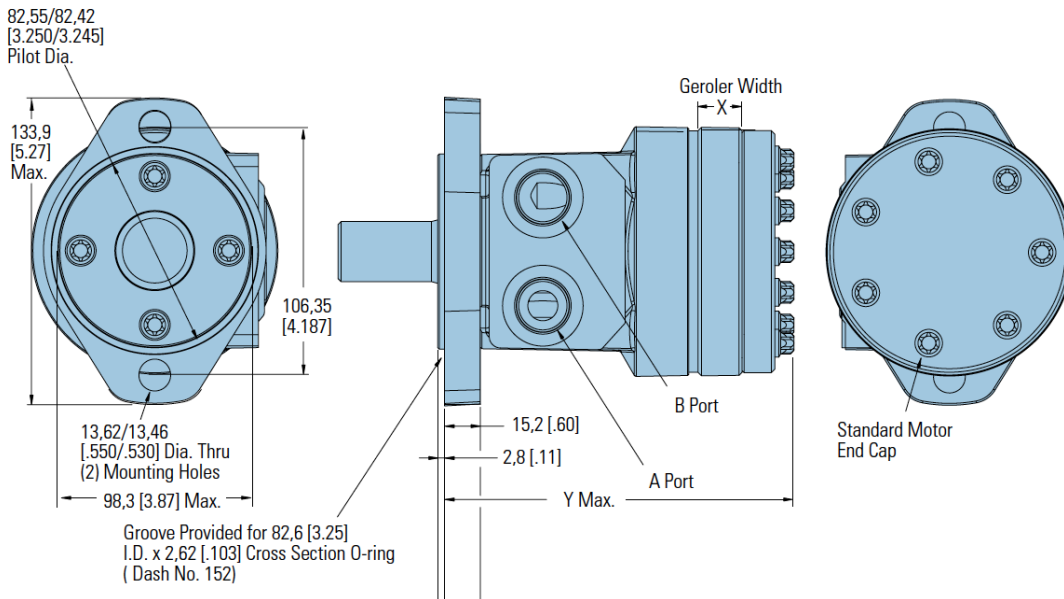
Geroler motor drawing identifying the recommended O ring [14]
